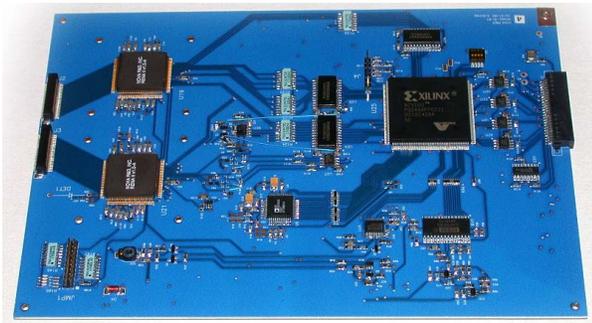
RENA-2 test PC board, which can accommodate up to two RENA-2 chips shown on the left with two standard connectors to mount detector(s). The RENA-2 chip can also be mechanically clamped to the board for initial acceptance tests. The large XILINX chip on the right is the FPGA that controls the whole test board and the RENA-2 IC.
